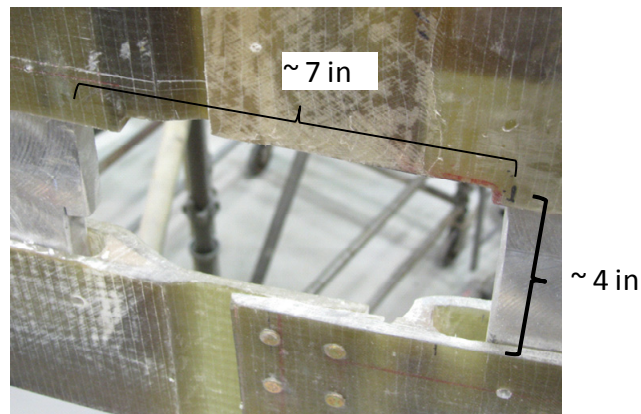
Typical separation joint opening (prior to installation of frangible joints, NASA Standard Initiators (NSI) and detonation cords).
